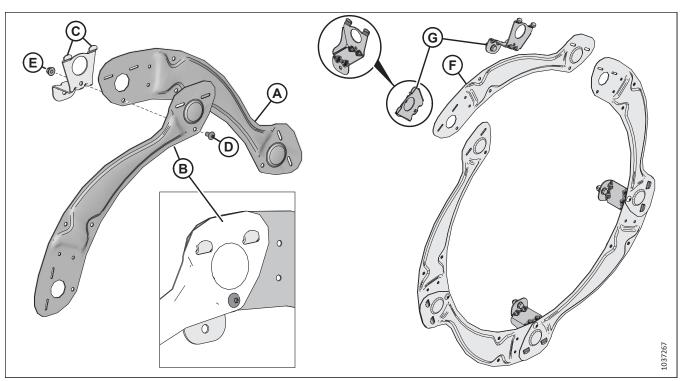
Five-Bat Reel - Initial Endshield Assembly
